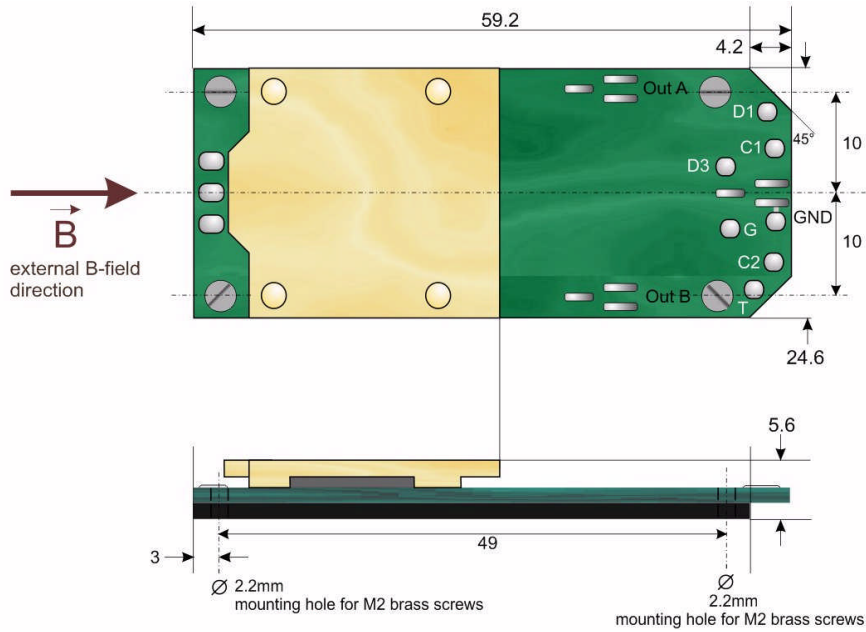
Case dimensions and orientation within external magnetic field. Dimension in Millimeters
